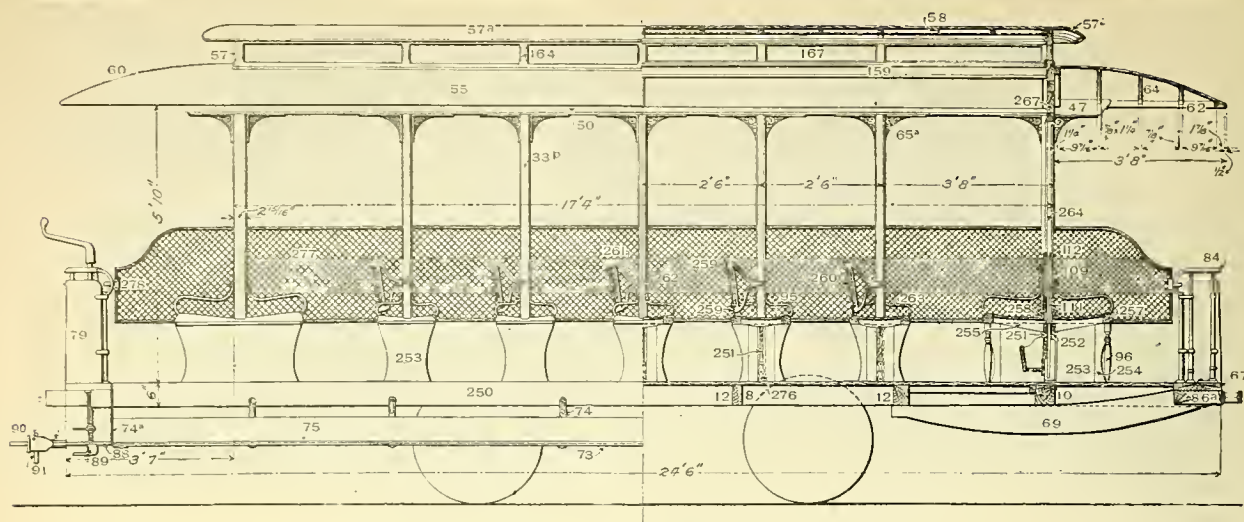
Half Side Elevation and Half Longitudinal Section.
